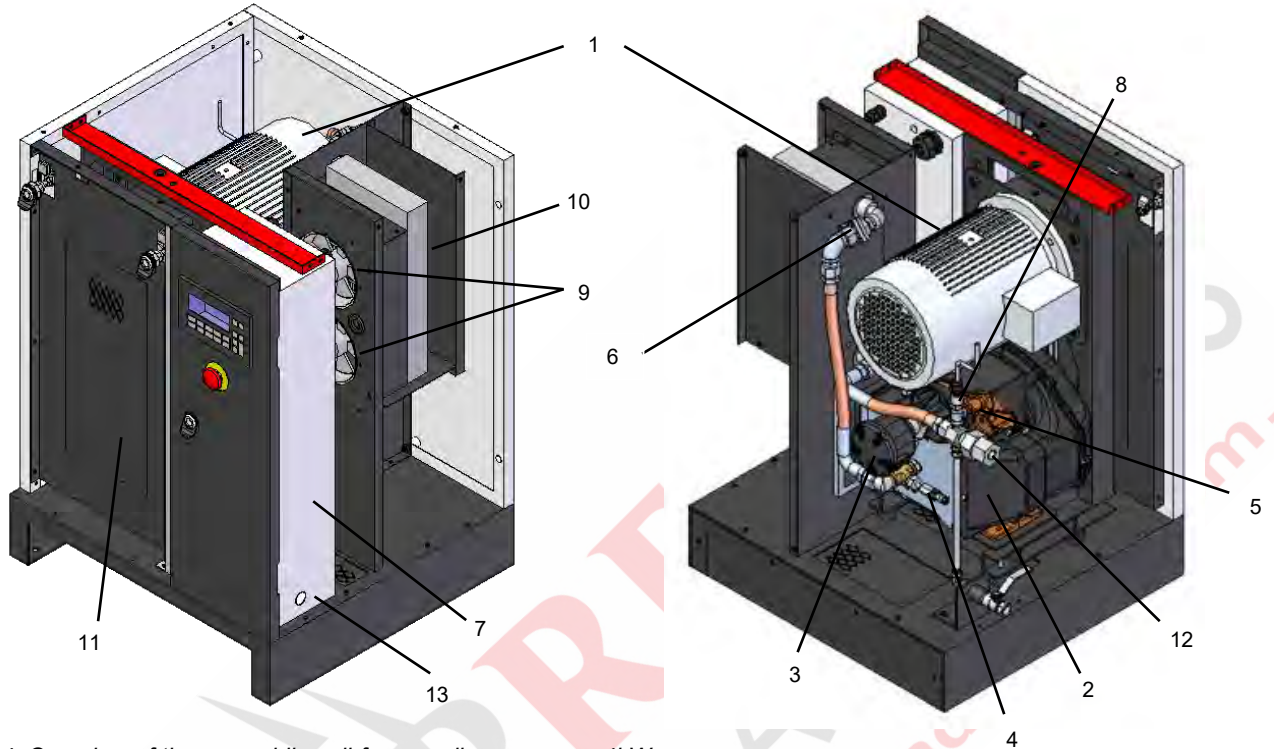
Overview of the assemblies:oil-free scroll compressor 4kW
